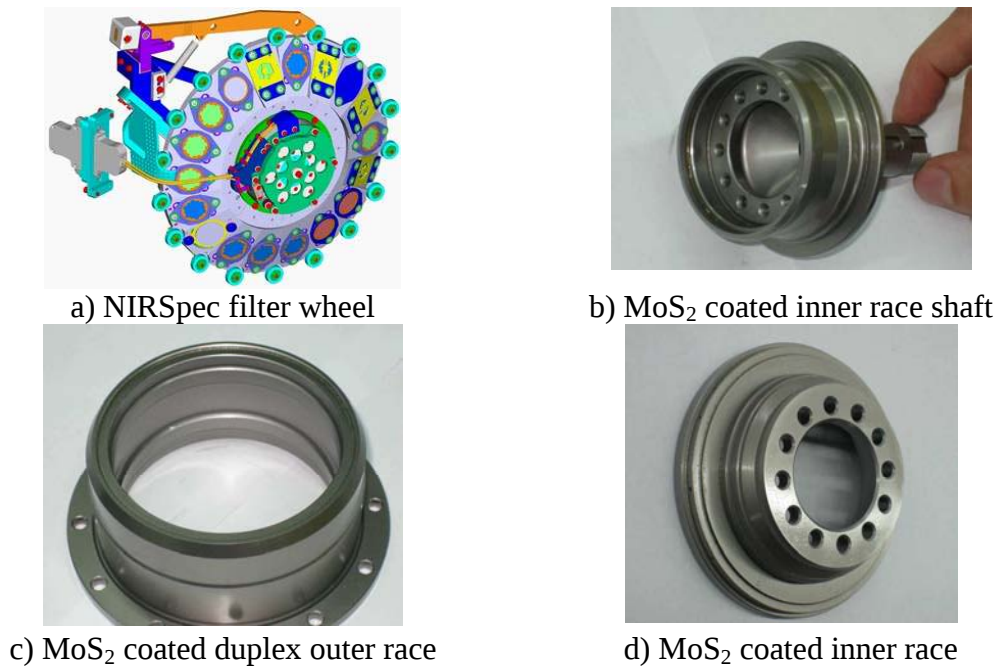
Showing MoS₂-coated main bearing components of the NIRSpec (near infrared spectrograph) filter wheel on the James Webb Space Telescope.
